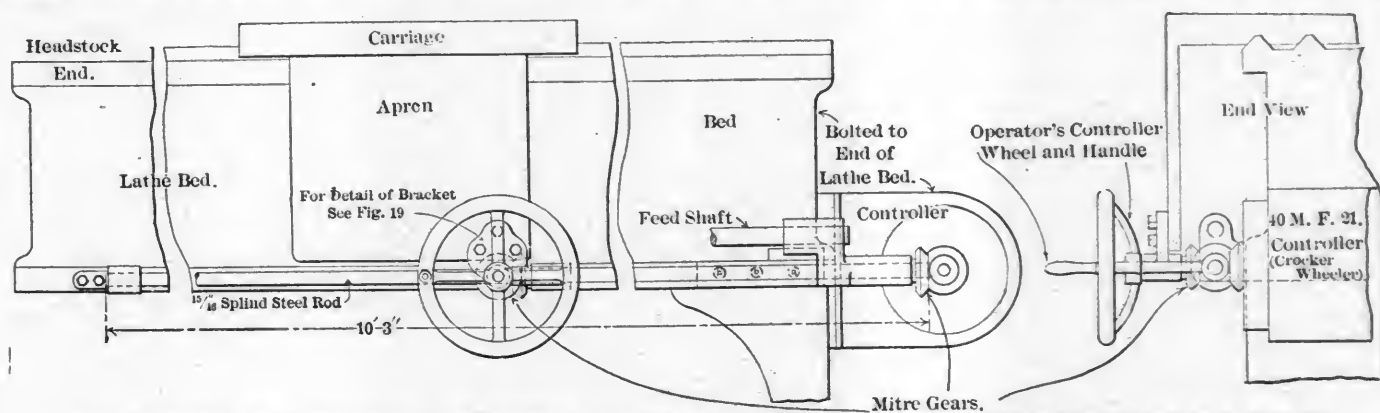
THE MOST CONVENIENT ARRANGEMENT FOR THE MOTOR CONTROLLER—CONTROLLER BOLTED TO END OF LATHE BED.
